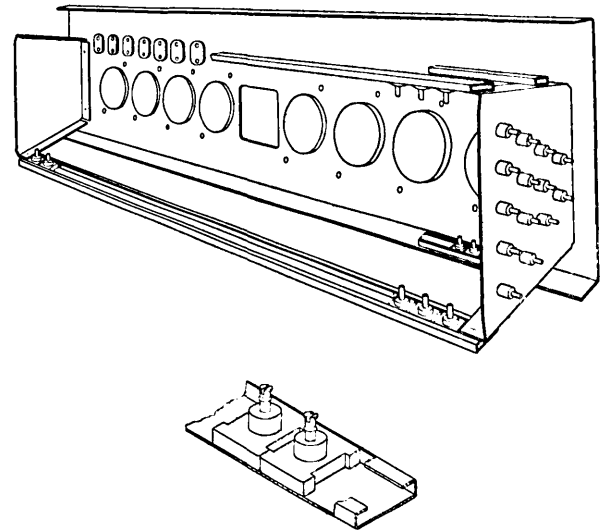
A standard chassis as used in the computer, showing the positions for mounting the eight B9G type valves, the B3A diode bases, the filament transformer in the centre of the chassis, and the tag rails for mounting the components.
